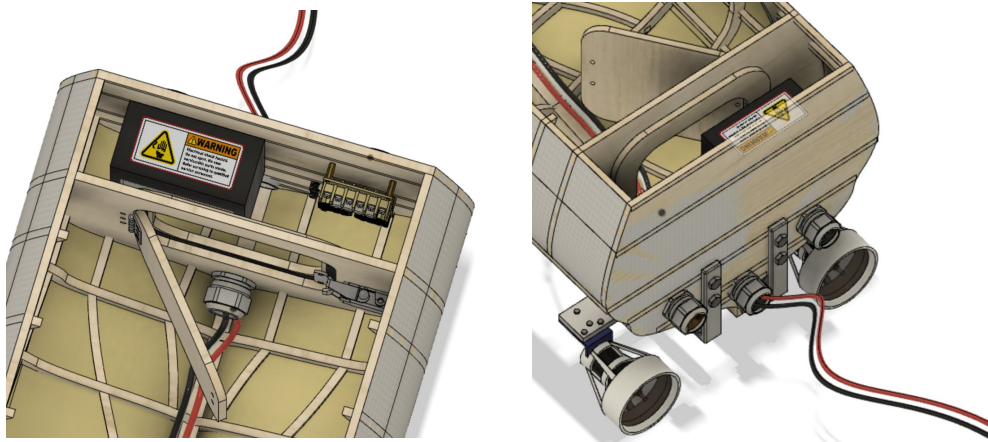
Forward Electronics Bay With Access Door Open (Left), With Top Removed (Right)
